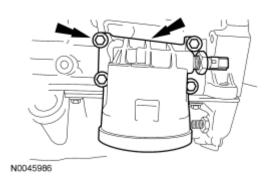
Locating Oil Filter Adapter And Bolts Courtesy of FORD MOTOR CO.
